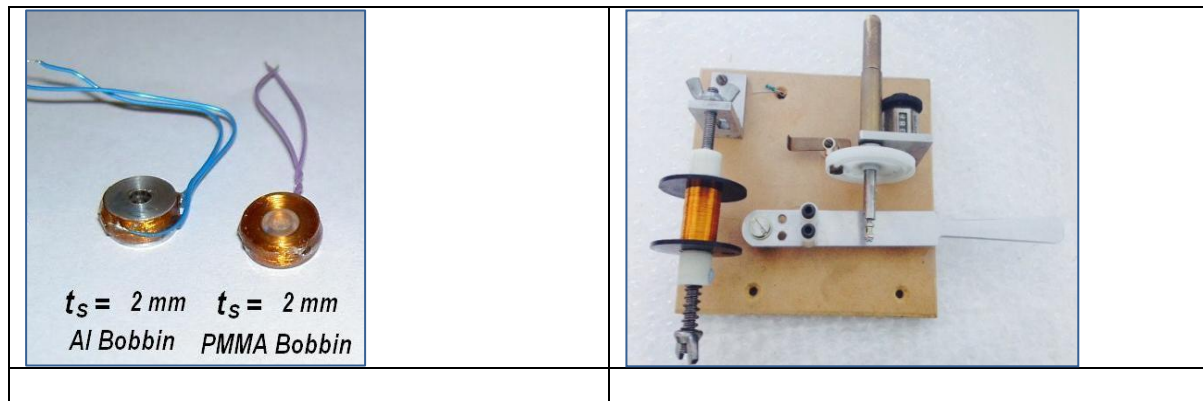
(a) Copper coil with aluminium and PMMA bobbin, (b) Coil winding machine
